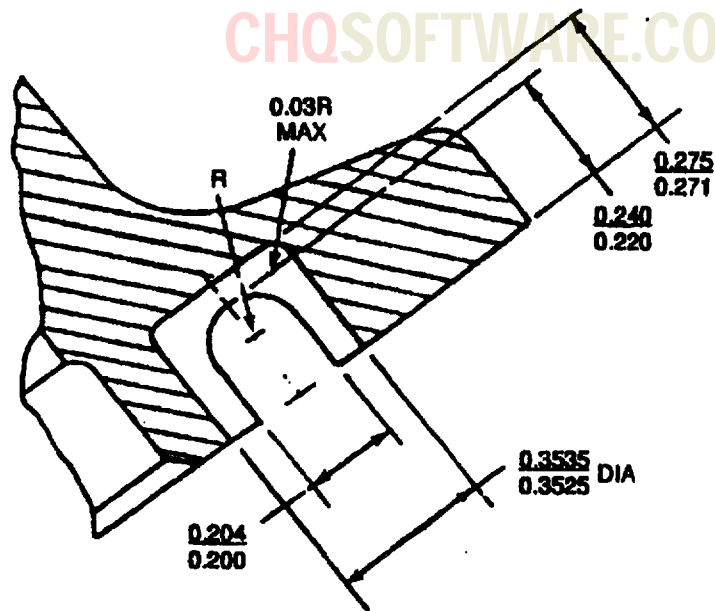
Inlet Housing Assembly - Rework (English) (Sheet 3 of 4).
